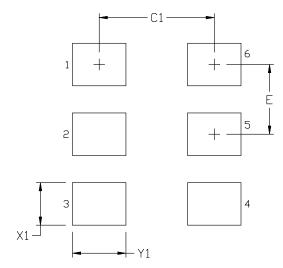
Si566 (5×7 mm) PCB Land Pattern
